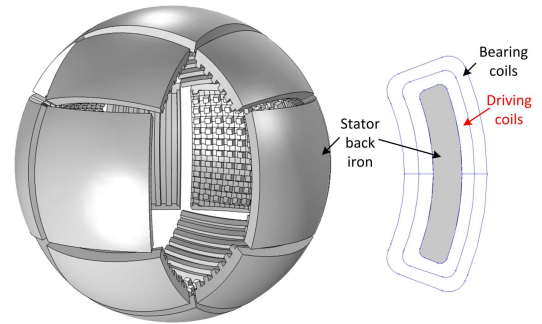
Assembled stator back iron where driving coils and bearing coils are wound around.
